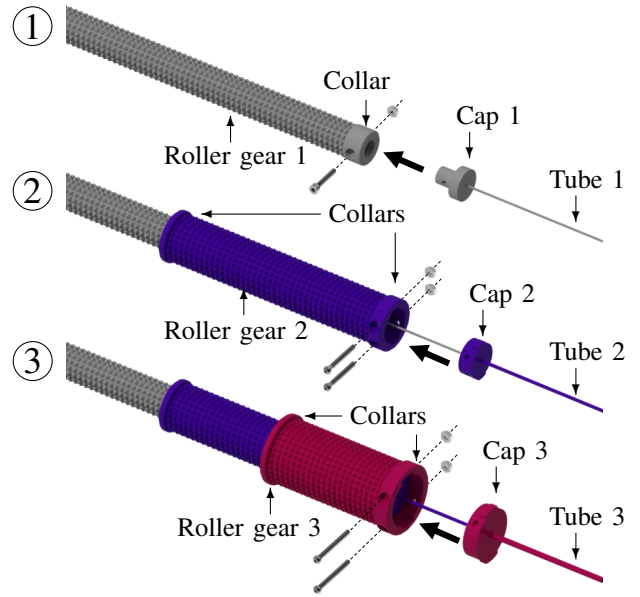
Sequence of assembly steps (labeled from 1 to 3) for the attachment of the tubes, which are pre-assembled on their respective caps, to the roller gears. The final assembly is then inserted in the lower guide and covered by the upper guide as illustrated in Fig. 4.
